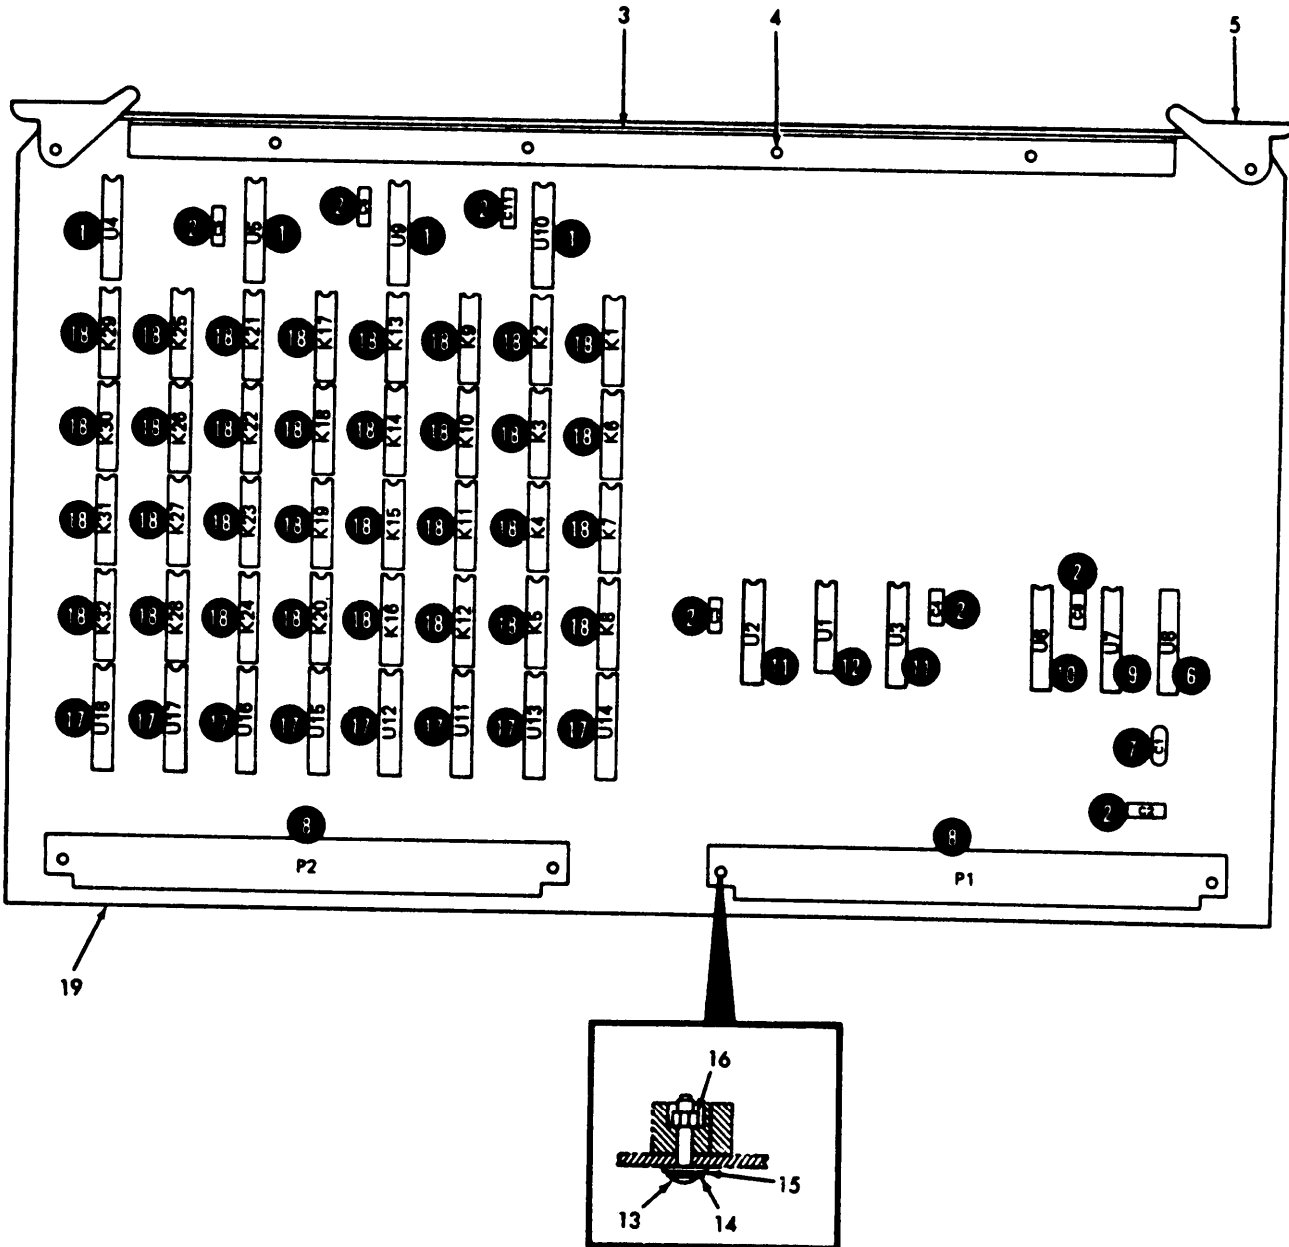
SCANNER CIRCUIT CARD ASSEMBLY A5, A6, A7
